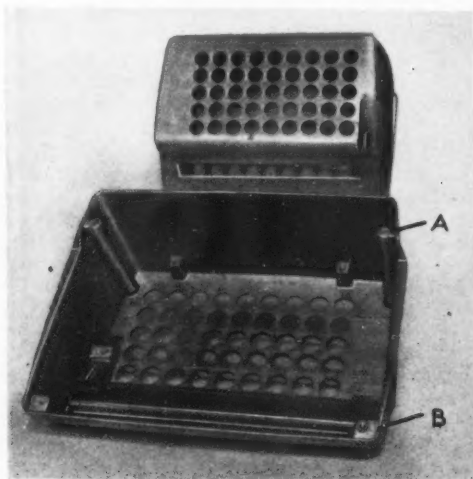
Two Aluminium-alloy Die Cast Cases for the Improved Plus Adding Machine. Cases for the Different Types of Plus Machine may have 12, 9 or 6 Rows of Holes, which are Produced by Cores in the Die. Internal Lugs in Each Case are Drilled and Tapped for the Base Fixing Screws
